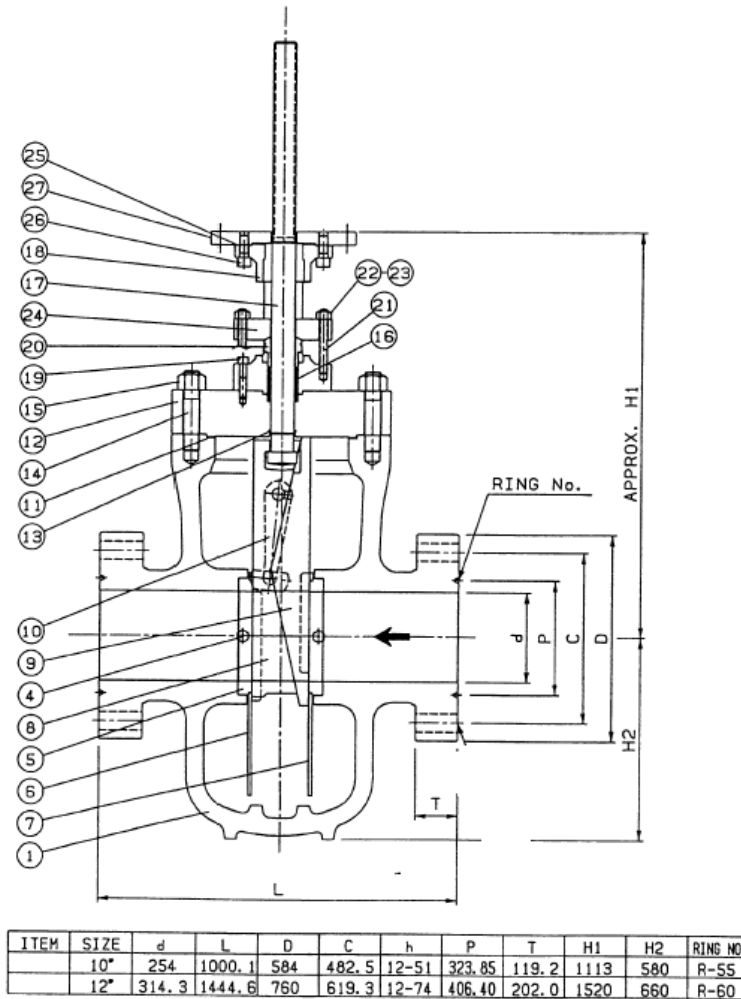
Cross sectional drawing of a ANSI 2500 master valve w. expanding gate (TIX).
